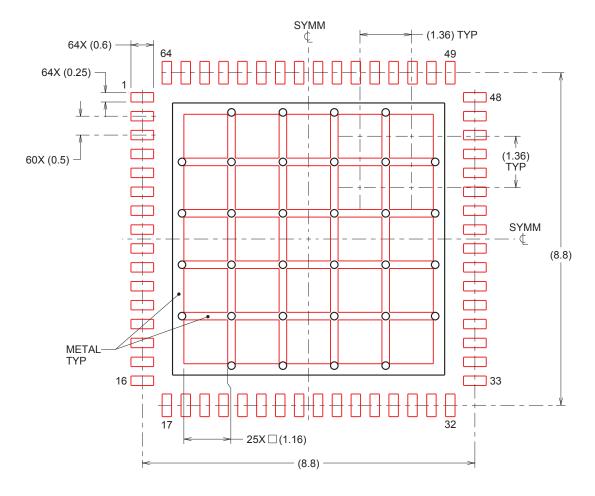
64-Pin WQFN Stencil Example of Via and Opening Placement (dimensions in mm)
